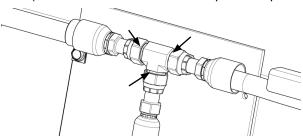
Check T Fittings On Front Side of Struts for Leaks
